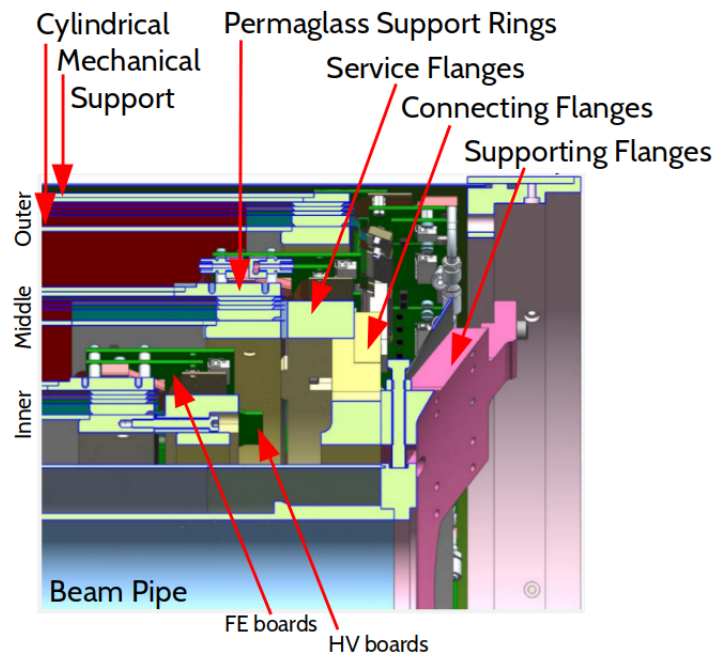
Detail of the mechanical structure at one extremity of the CGEM-IT for BESIII. Arrows indicate relevant details [36].
